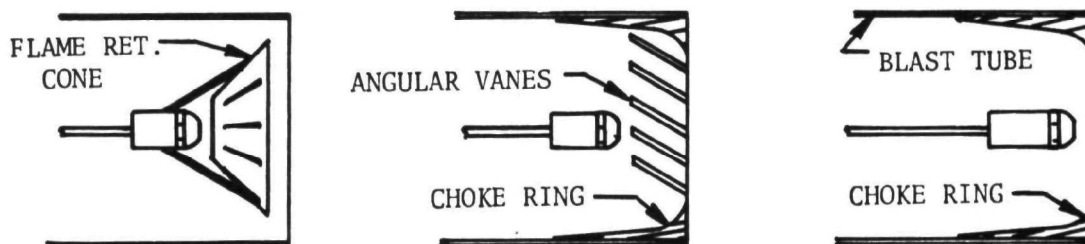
Three typical air diffuser designs used in the ends of oil burner blast tubes
